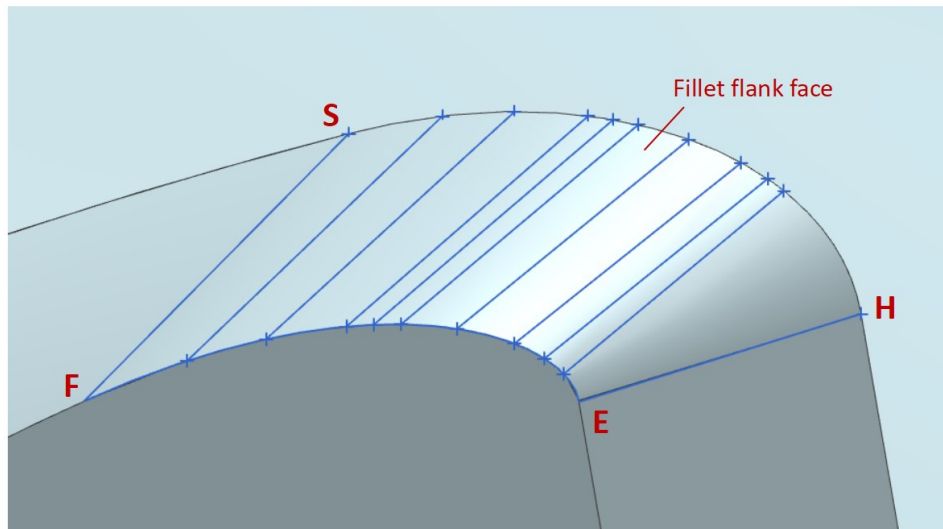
A ruled surface is modeled as the fillet flank face.
